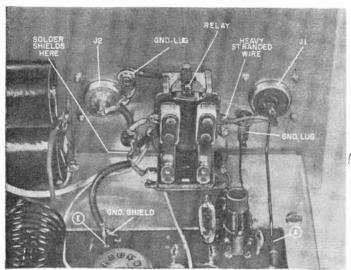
Be sure to use heavy stranded wire from J1 to indicated relay terminal, and solder the cable shields together to insure common ground throughout.
